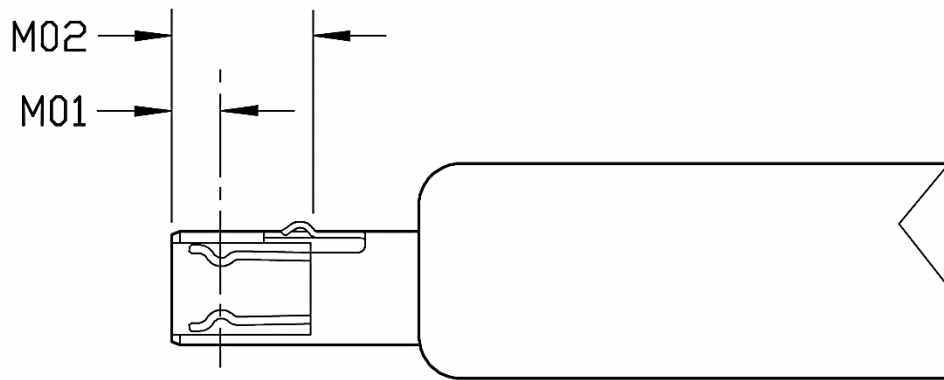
Passive Latching Dimensions for x4 Free Cable Assemblies
